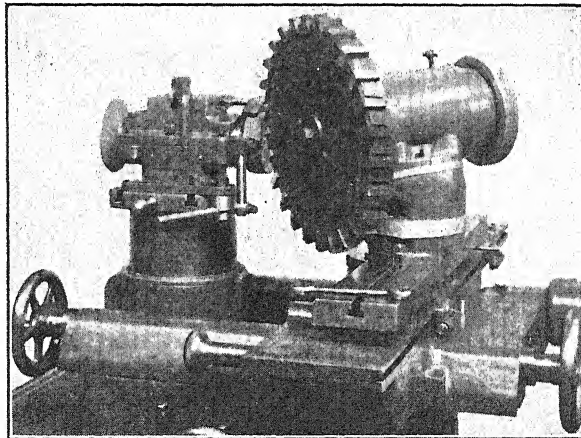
Grinding the Relief and Corner Bevel on the Inserted High-Speed-Steel Teeth of a 20-In.-Dia. Face Mill Using a Straight Cup Wheel.
